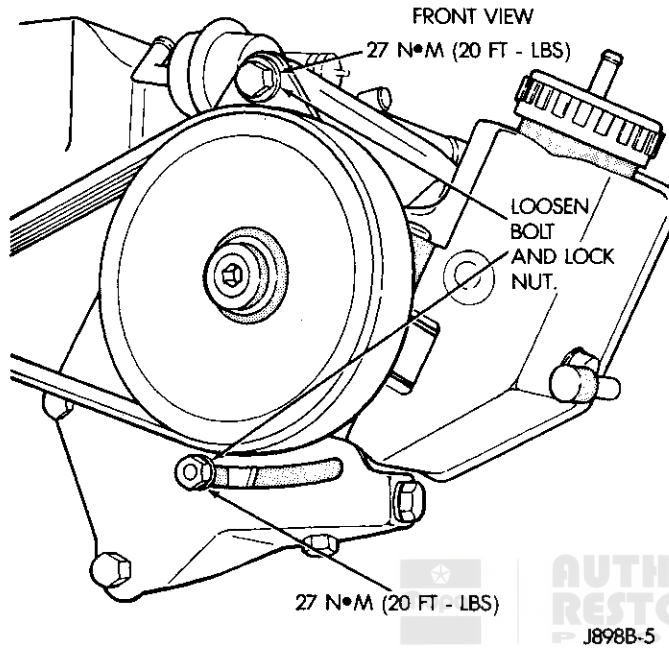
Serpentine Drive Belt Adjustment 2.5L and 4.0L with P.S. — Front View
